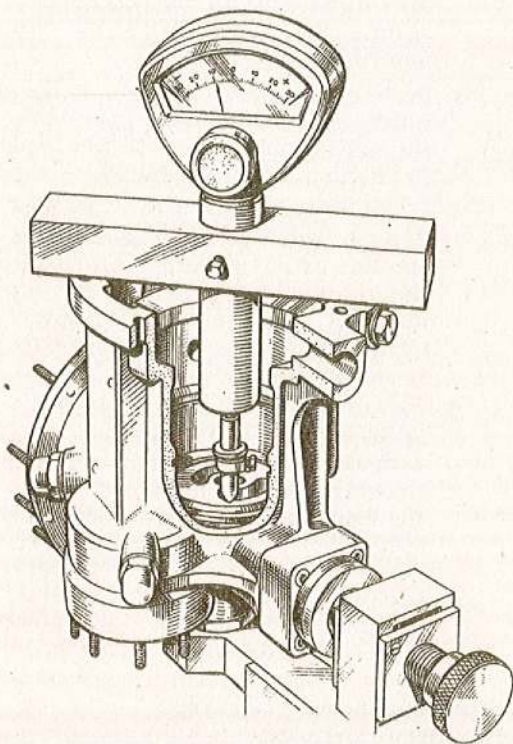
Testing the port insert for parallelism to the pump housing flange
